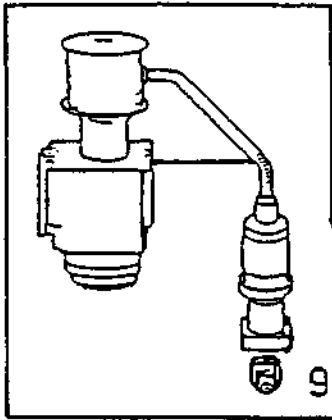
Arrangement of Cooling Water Pipes
